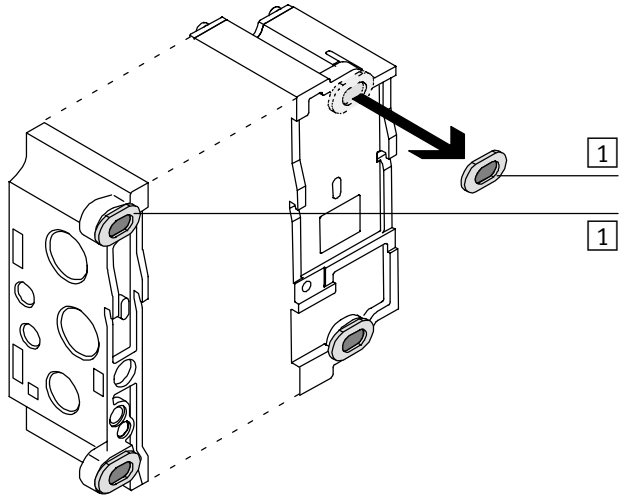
/11: Rear view: Spacer rings on the right-hand end plate and the pneumatics interface
